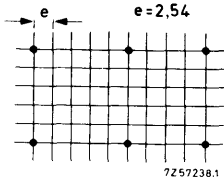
Hole pattern for mounting on a printed-wiring board, hole diameter  $1,3 \pm 0,1$  mm.
